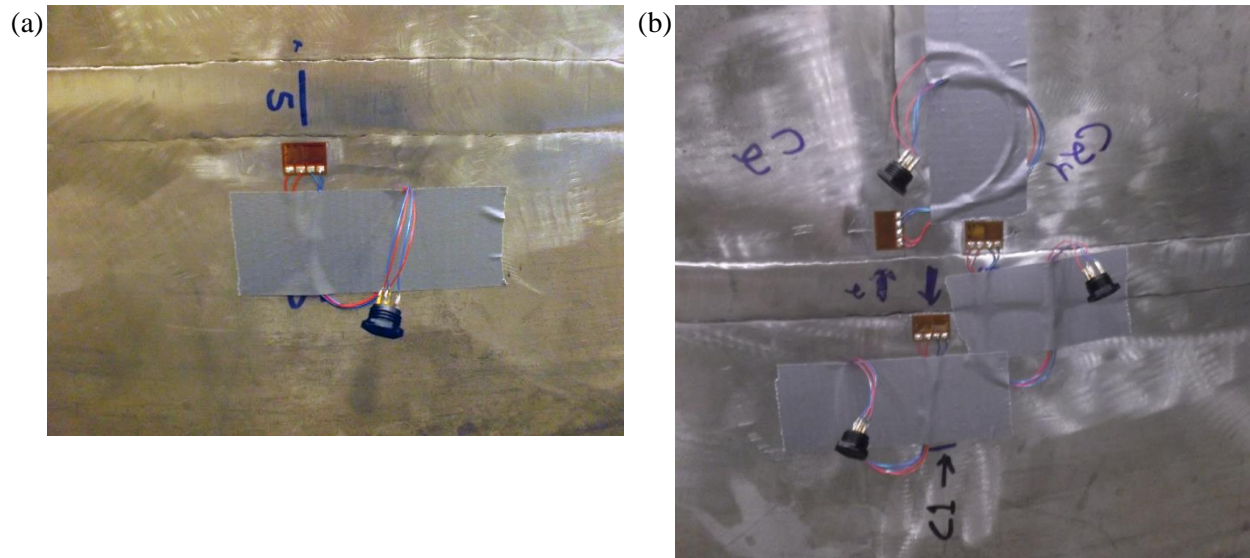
Surface strain gauges were positioned along the longitudinal and circumferential welds. Gauges were placed as close to the weld FZ as possible (a). In addition, a series of three sensors were positioned in each location where a circumferential weld intersected with a longitudinal weld (b).
